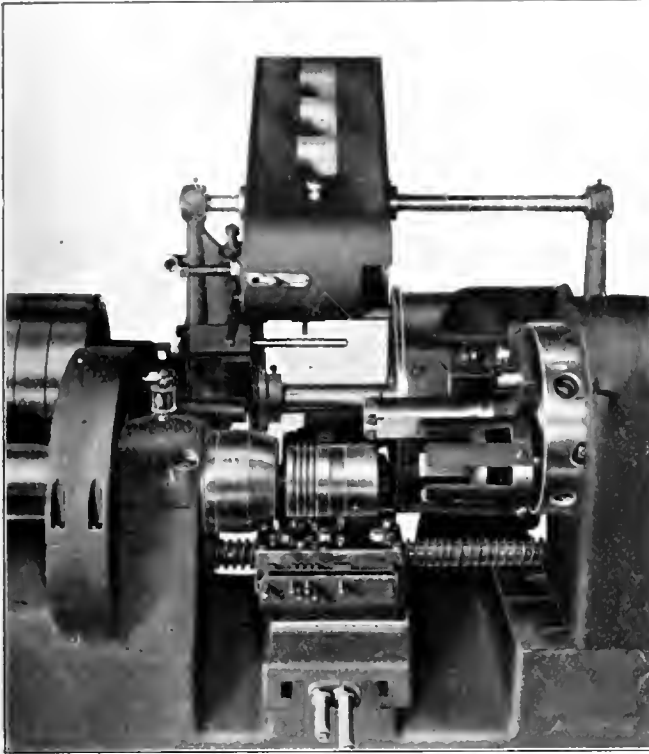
Cleveland Automatic Screw Machine operating on Piston shown in Fig. 2.
